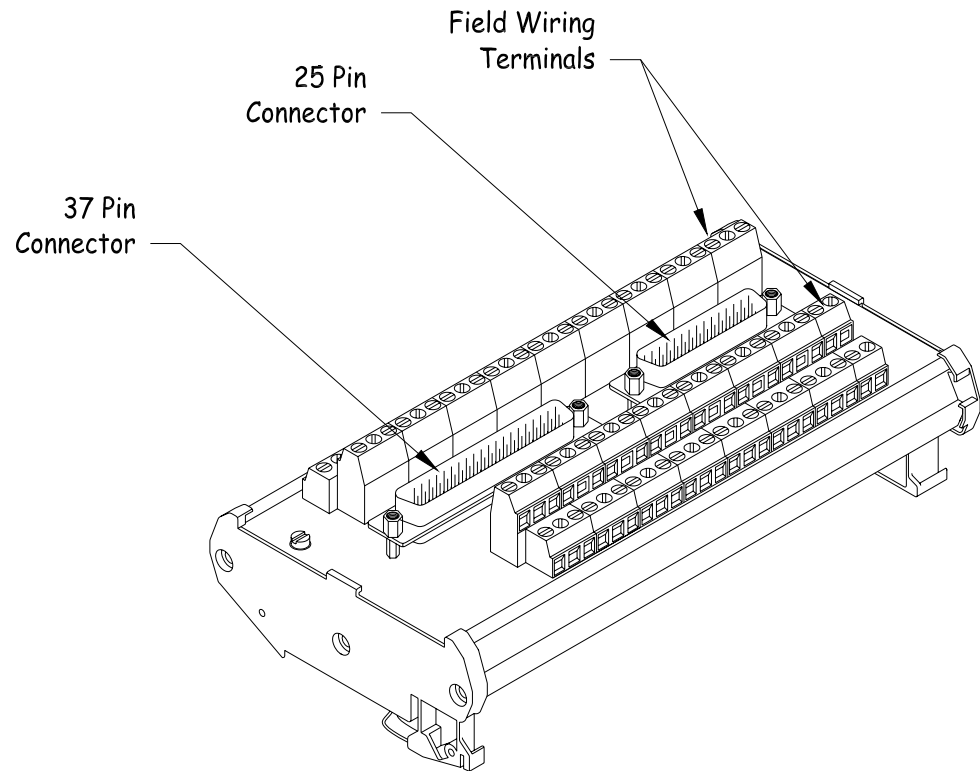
I/O Terminal Board Assembly. (P/N 21300003)
